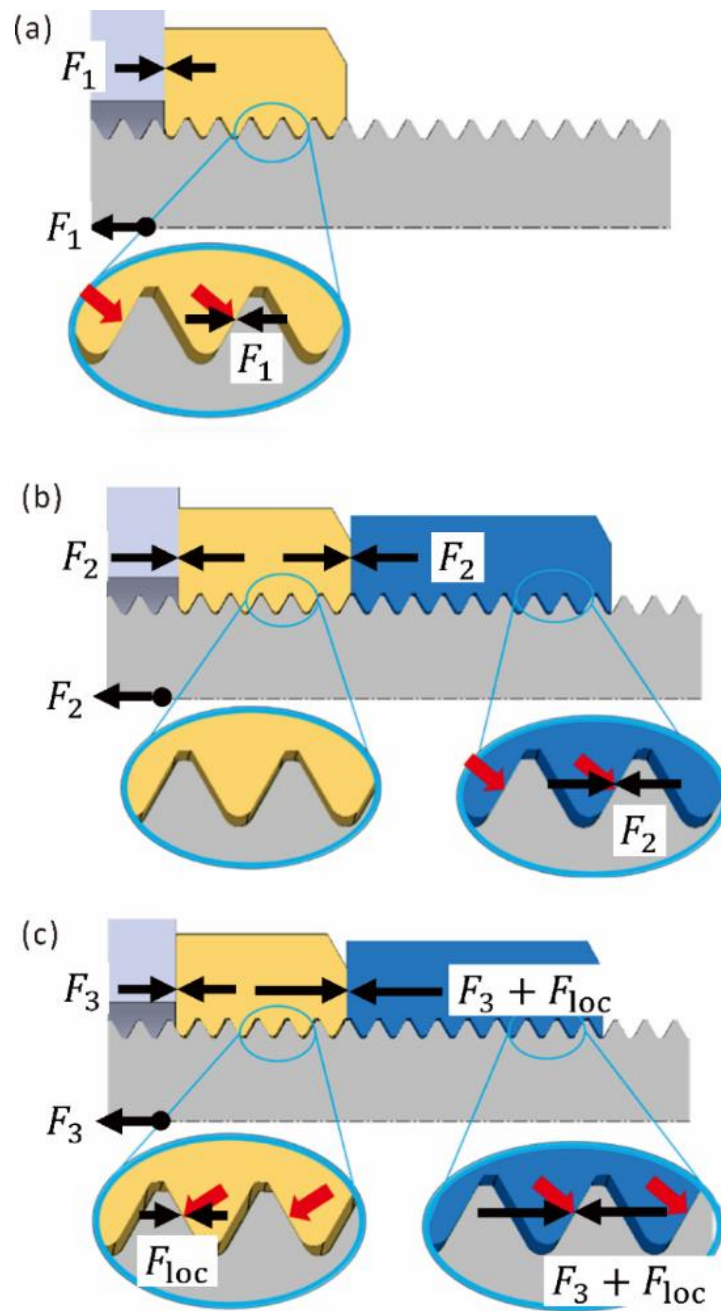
Change in mating condition of a single-thread bolt with a double-nut structure as the inner and outer nuts are tightened: (a) first step, after tightening the inner nut; (b) second step, after tightening the outer nut; and (c) third step, after reverse tightening the inner nut
